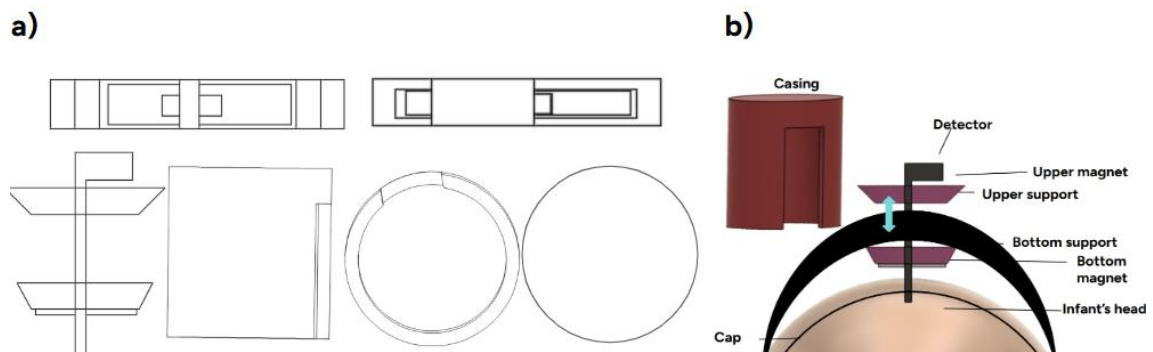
Design of the adjustable magnetic mechanism. a) Sketch of the individual components b) 3D design generated in Autodesk Fusion 360 of the mechanism.
